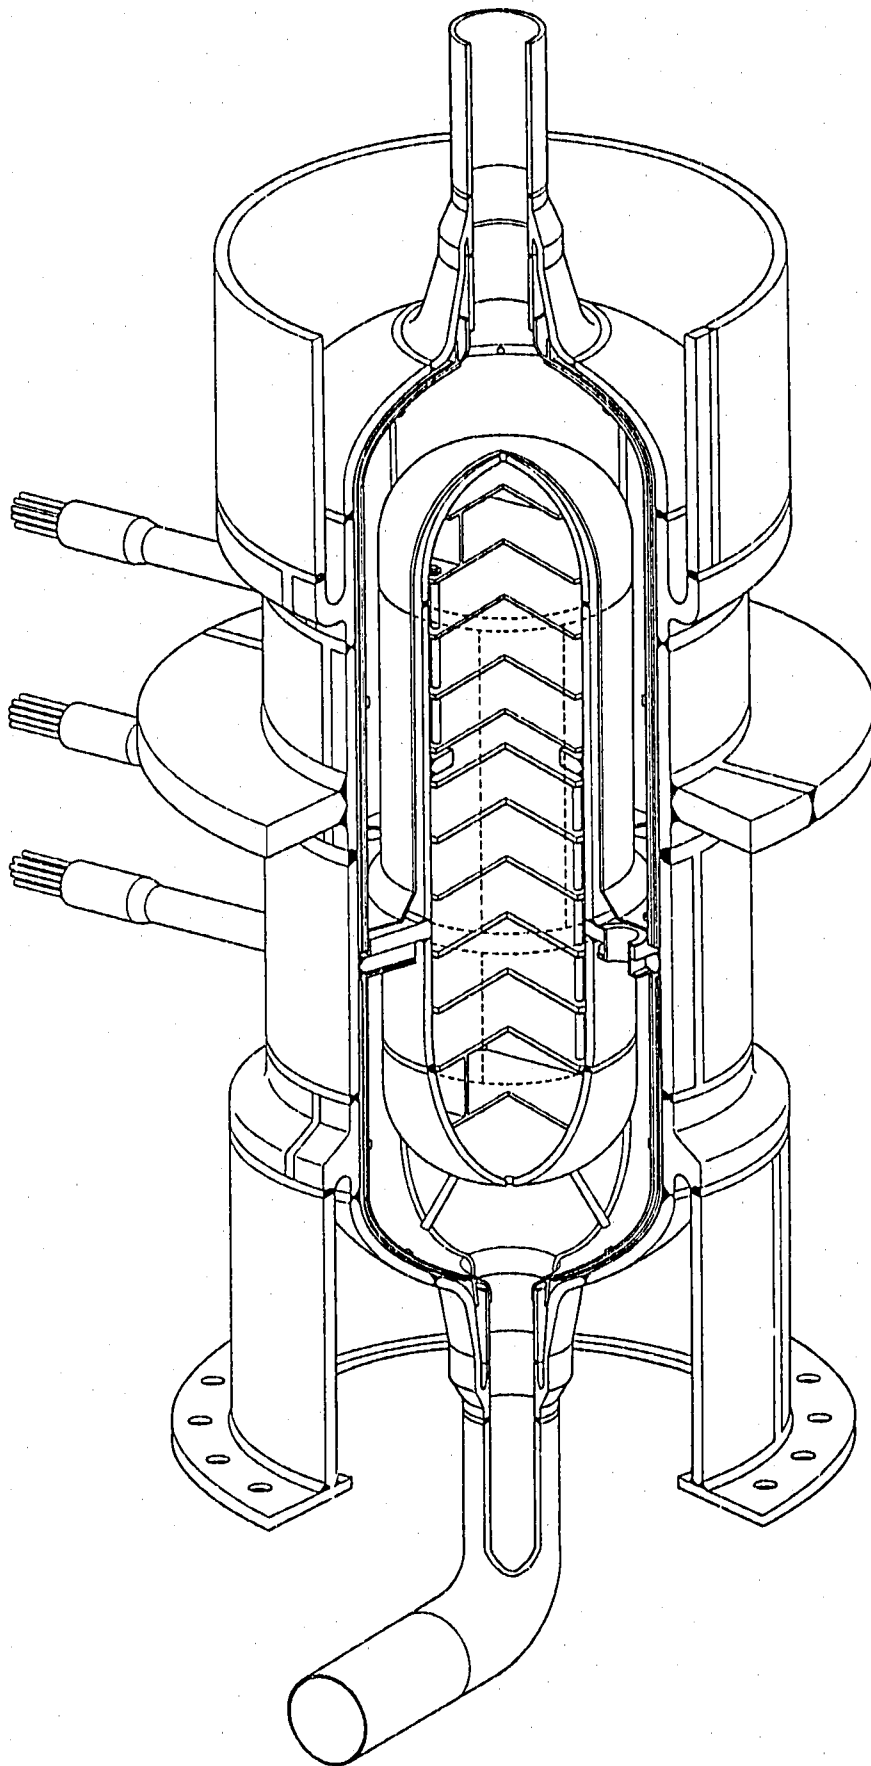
Perspective View of Welded Vessel Model
